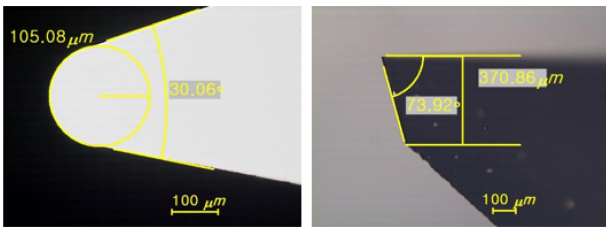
Single crystal diamond cutting tool with nose radius of 105.08 μm, window angle of 150° and clearance angle of 16.08°
